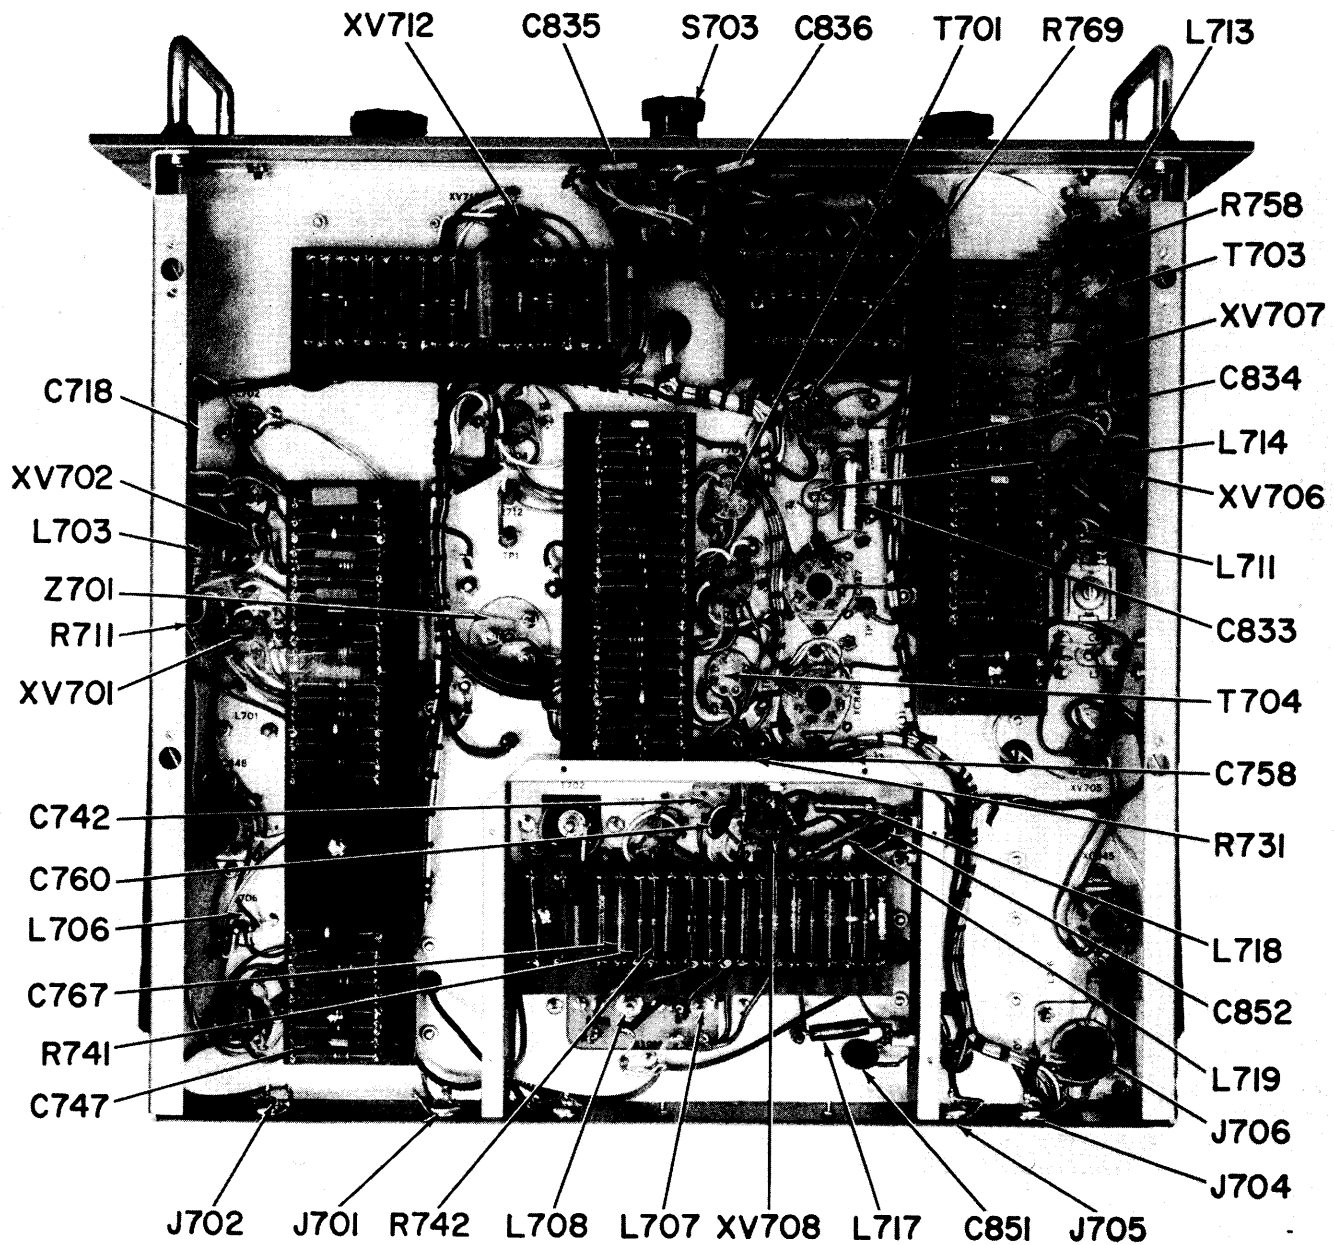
Location Diagram of Major Electronic Equipment Components, Bottom View
